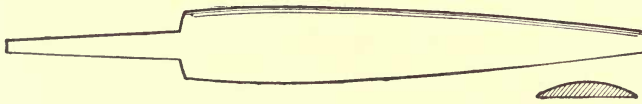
SIDE SCRAPER FOR JOURNAL BEARINGS.
